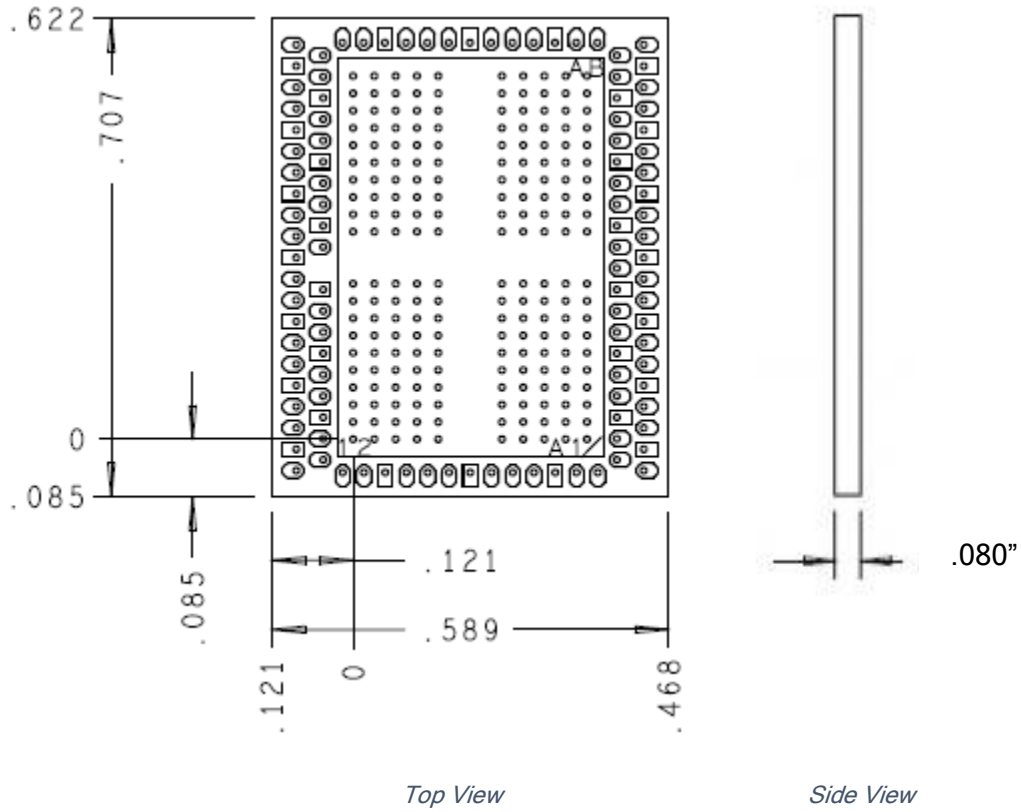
LPDDR4 200 Ball XH Series Direct Attach Interposer Mechanical Dimensions
